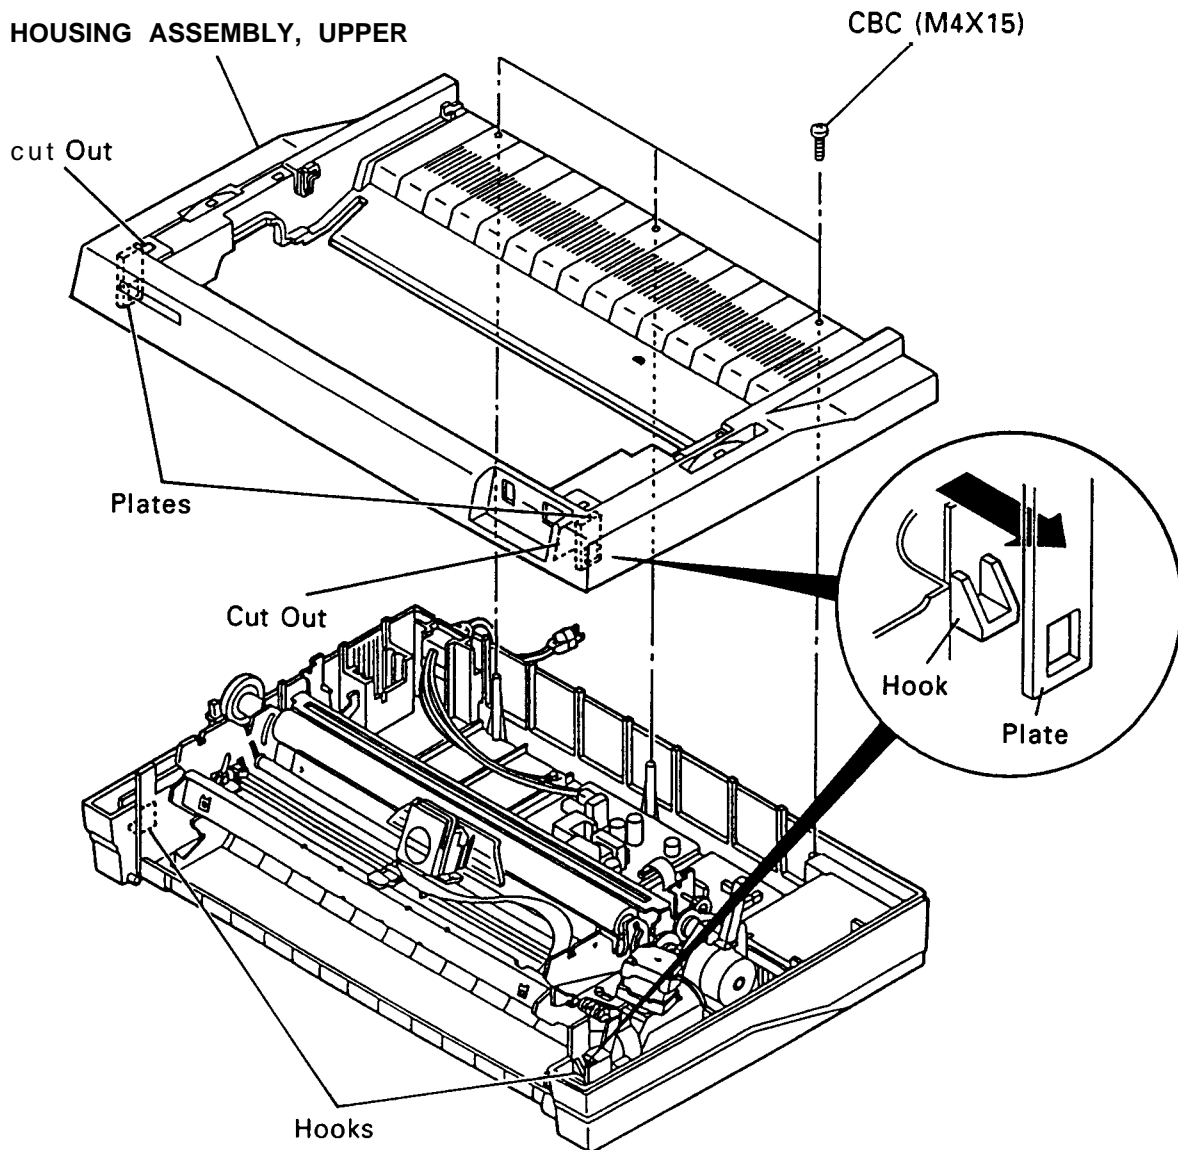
Removing the HOUSING ASSEMBLY, UPPER
